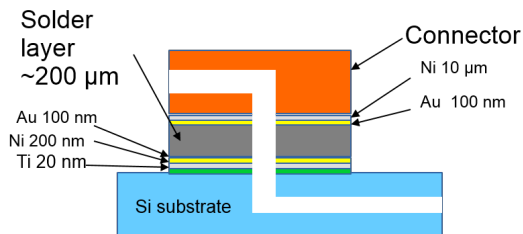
Cross section of the solder joint. The metallization is necessary to ensure a good attachment to both surfaces.
